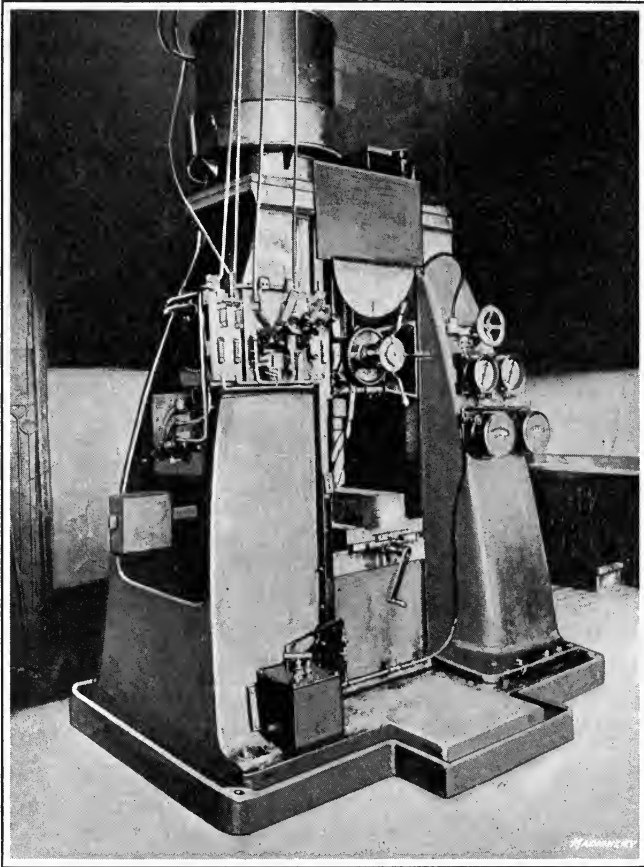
Special Drilling Machine used in Laboratory of Standard Tool Co.
